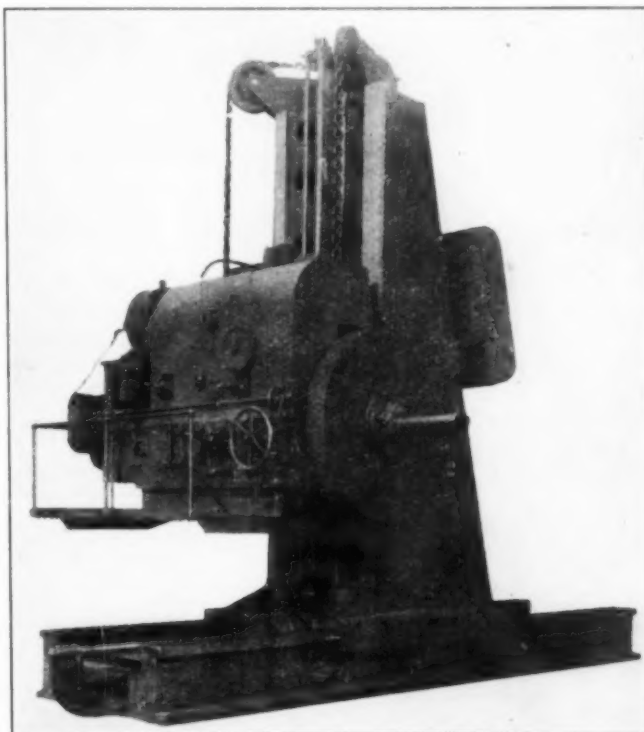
FLOOR BORING, DRILLING, AND MILLING MACHINE
